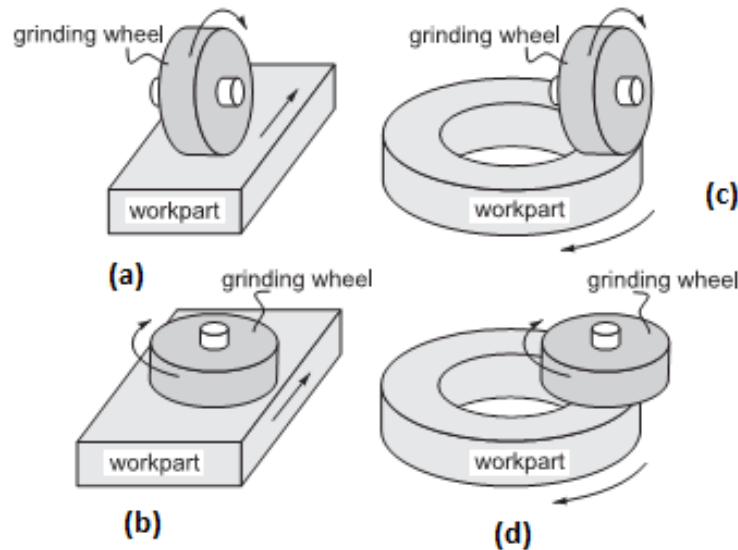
Four types of surface grinding with horizontal or vertical spindles, and with reciprocating linear motion or rotating motion of the work piece
